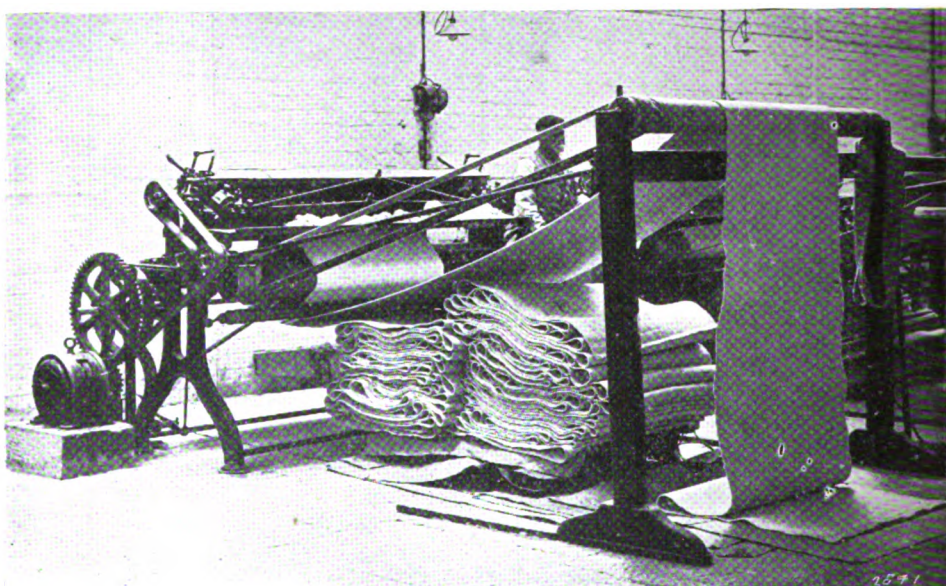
METHOD OF DRIVING SHEARING MACHINES.
